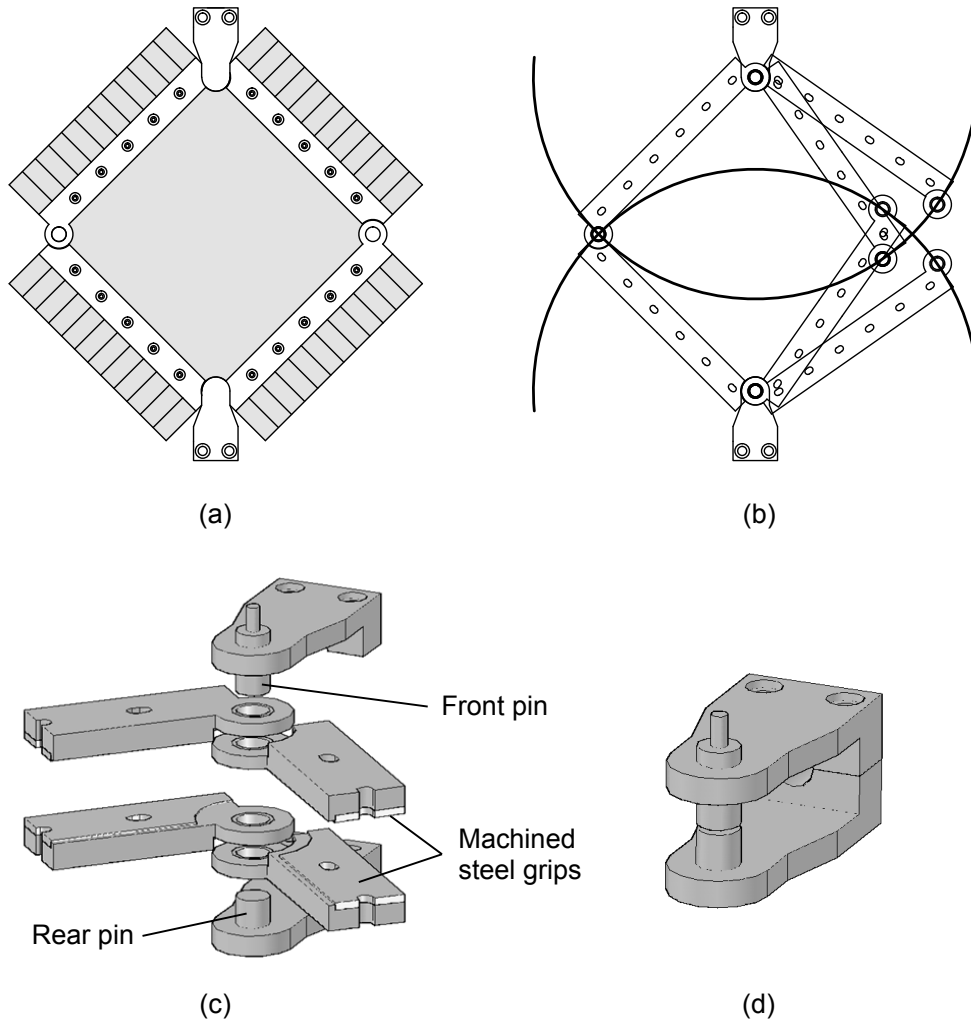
(a) Schematic of picture frame shear tester developed; (b) alignment of the frame's components; (c) exploded view of pinned corner connection; and (d) aligned corner bracket
